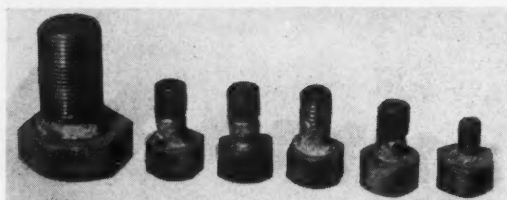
Nuts welded on the broken studs do the trick. Here are six of the problems solved by means of the electric arc—at 20 times the speed.
